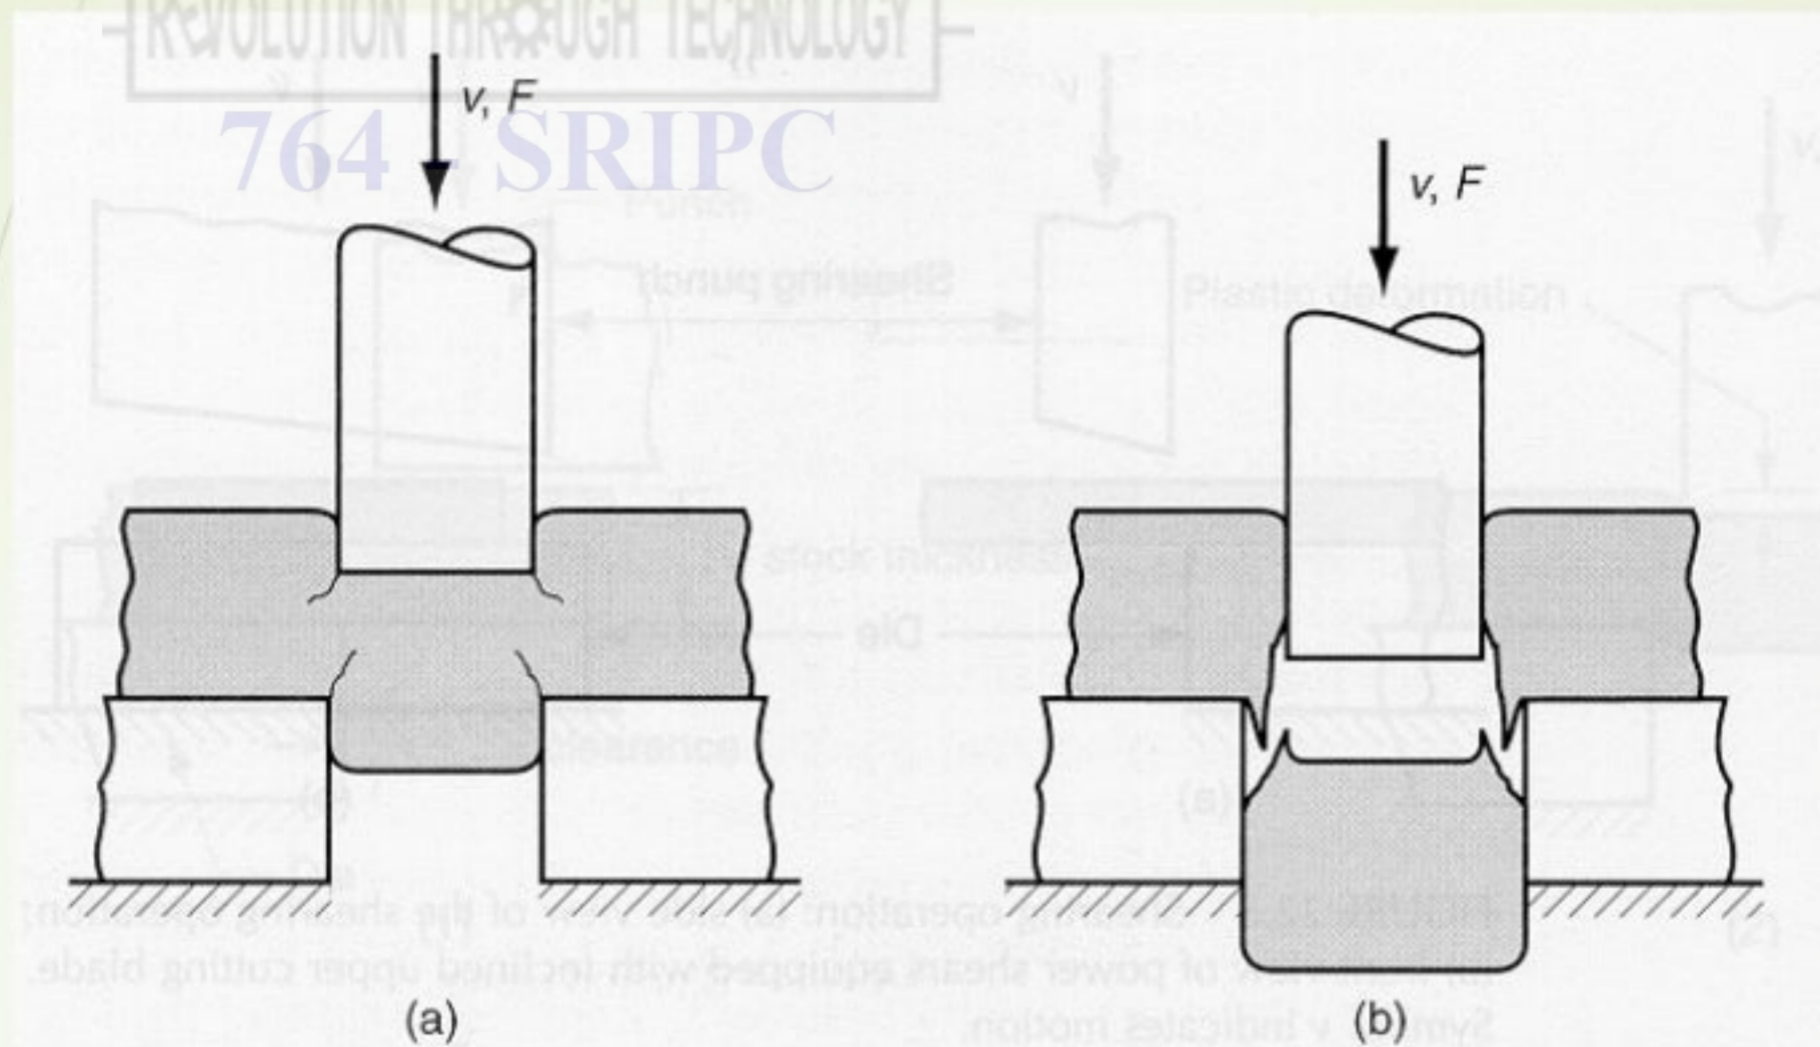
Effect of clearance: (a) clearance too small causes less than optimal fracture and excessive forces and (b) clearance too large causes oversized burr. Symbols v and F indicate motion and applied force, respectively.
